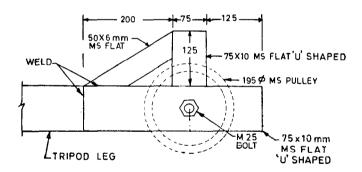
DETAILS OF HOISTING EQUIPMENTS TYPE B — Contd
